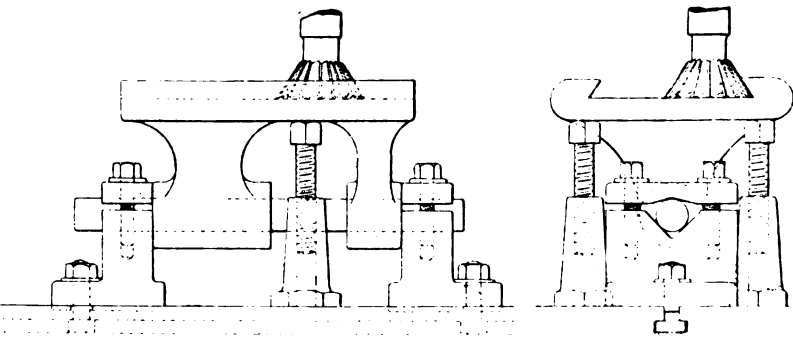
Angular Mill facing Bracket supported in Vee Blocks.
